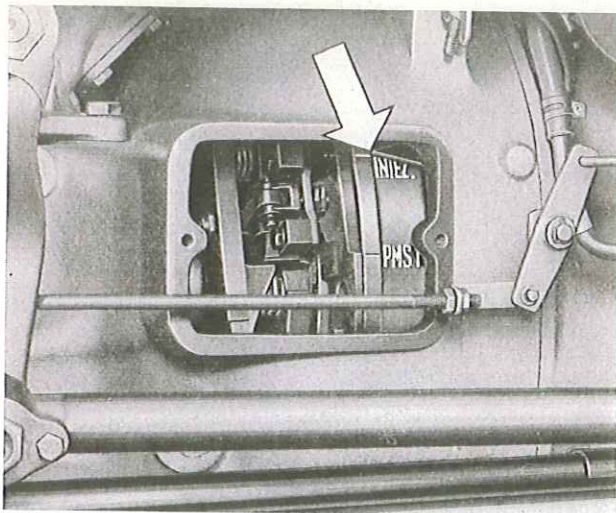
Reference mark on flywheel indicating injection advance (21° before T.D.C.).
